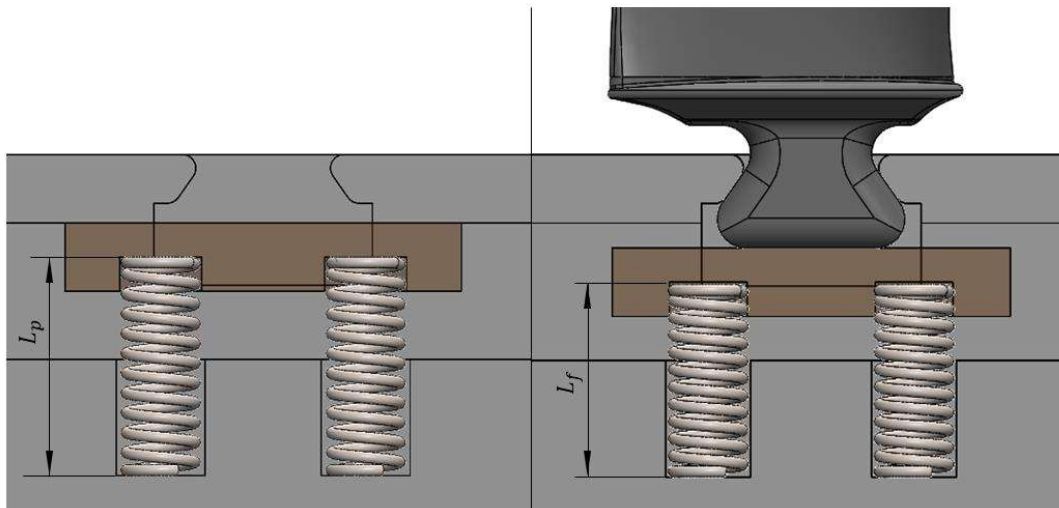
Blade's Spring-based Fastening Mechanism
